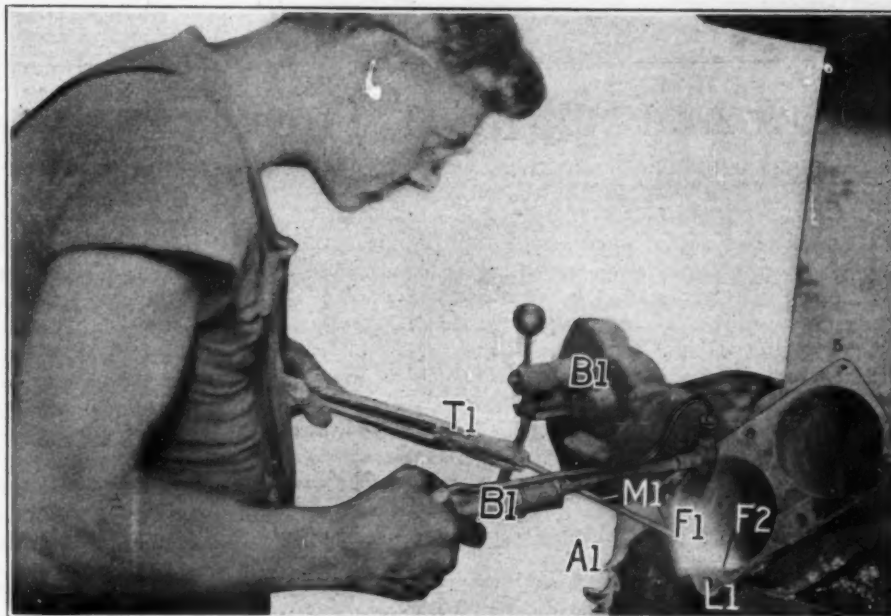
Showing operator working at inside of cylinder to repair a crack
